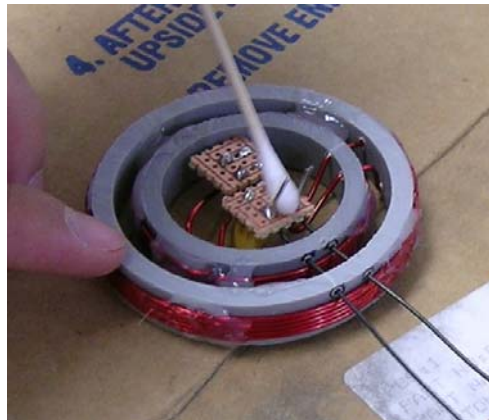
Cleaning Steel Sensing Wires Before Soldering
